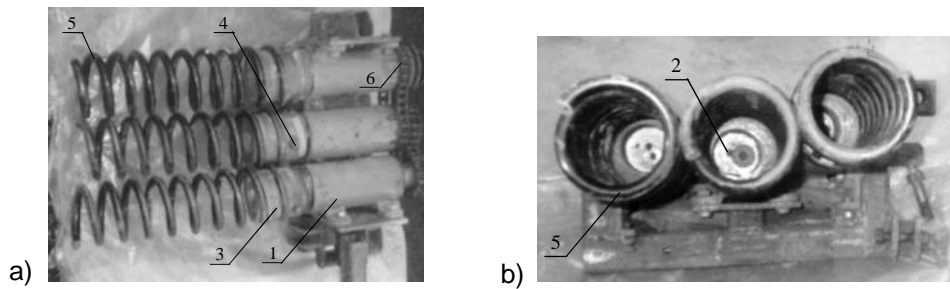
Spiral-type potato cleaning unit of authors' design (a – top view; b – side view): 1 – bearing assembly for mounting spirals; 2 – hub; 3 – holder; 4 – fastening bolt; 5 – spiral spring; 6 – chain drive.
